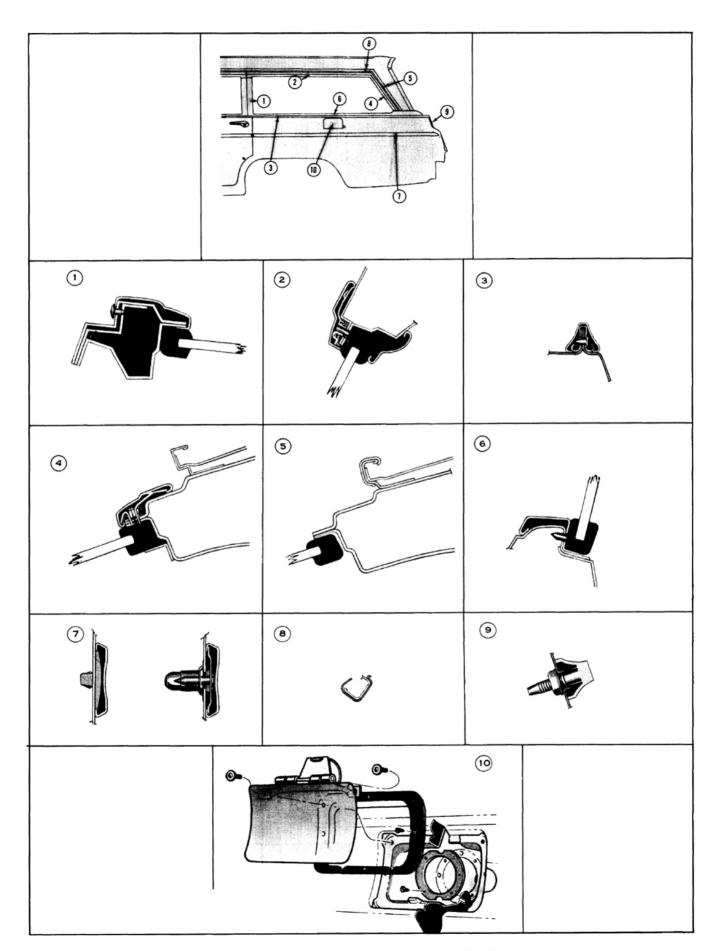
Quarter Panel Exterior Molding Attachment
